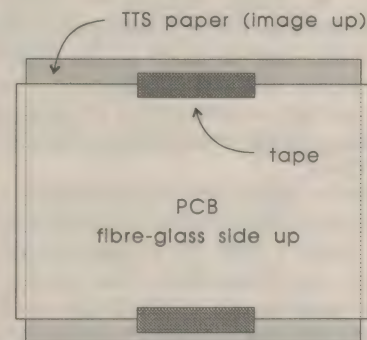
You would expect a better result by ironing the TTS paper on top of the copper side of the PCB. However, when placed upside down (as shown), ironing the fibre-glass side with a light-weight iron actually gives a more uniform heat transfer.
